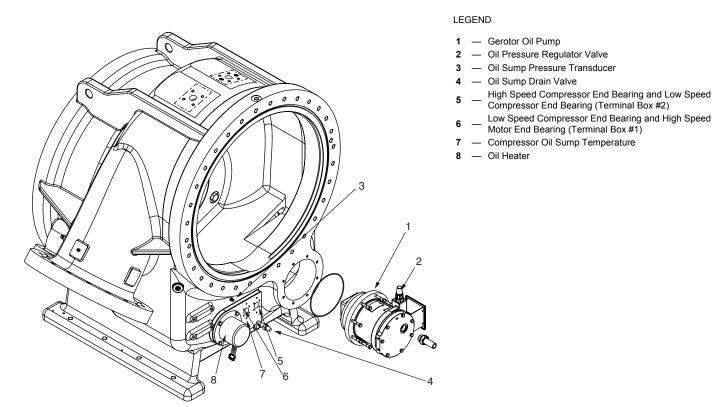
19XR6-7 Gerotor Oil Pump
